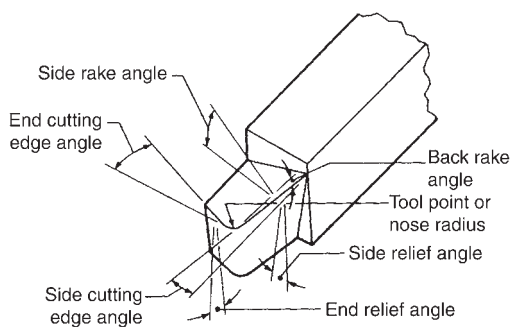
Terms applied to single-point turning tools. The side rake angle shown is positive.
